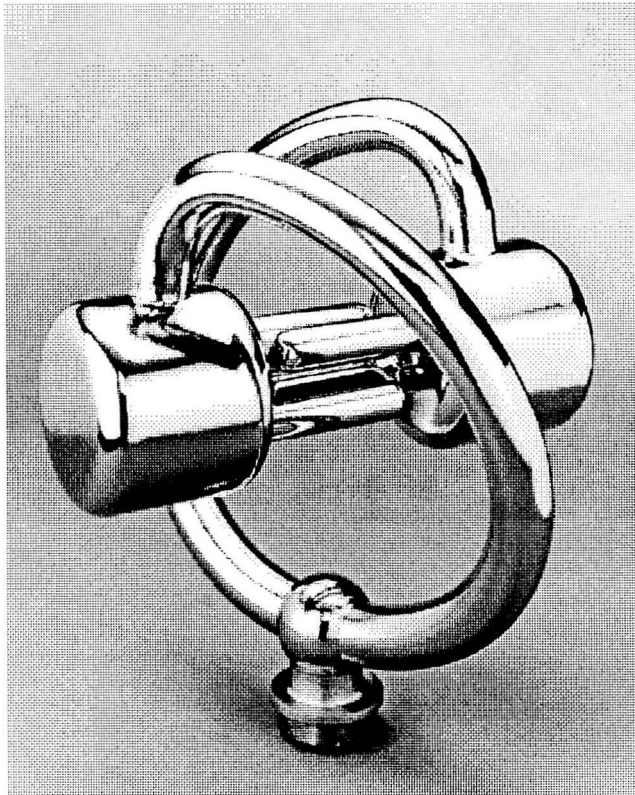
Niobium split-ring assembly with RFQ vanes prior to being welded to the outer housing.
